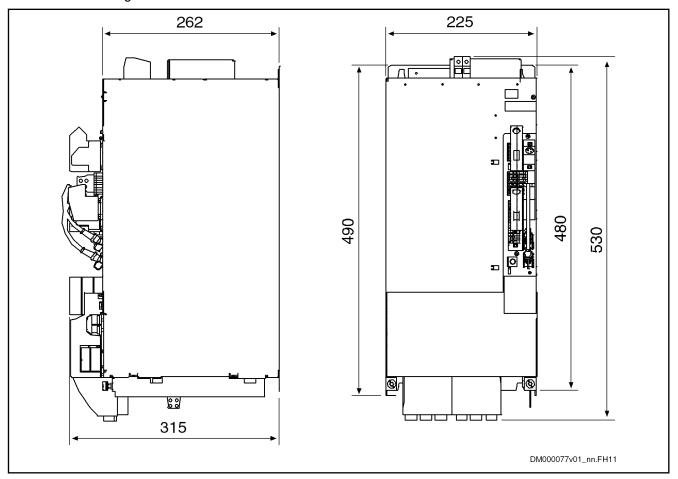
Dimensional drawing HCS03.1E-W0100 and HCS03.1E-W150
